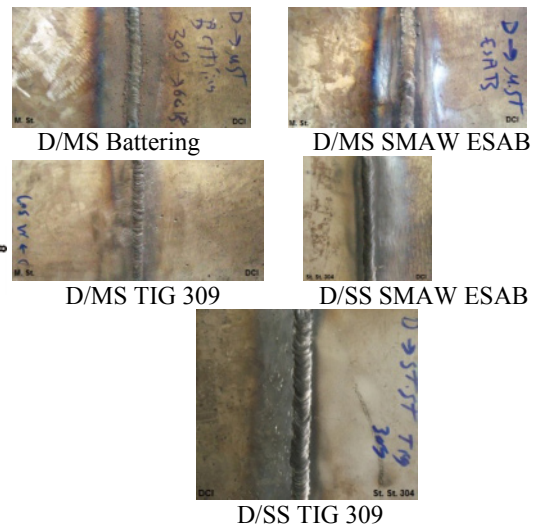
Examples for dissimilar welded specimens of ductile cast iron with stainless steel 304 and mild steel 37 made by various welding procedures.
